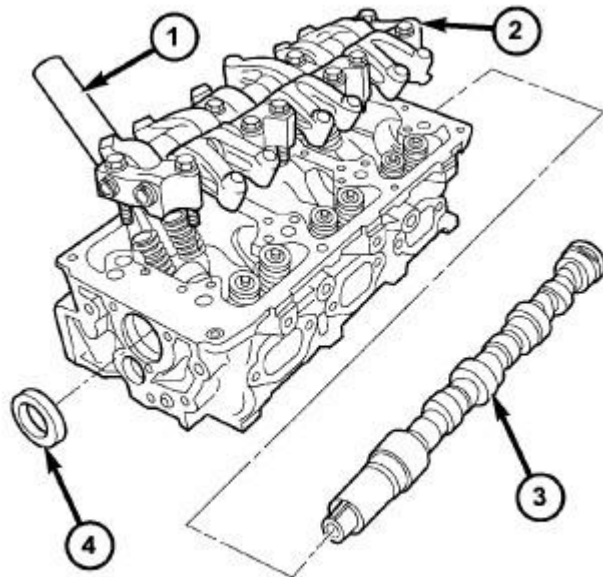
CYLINDER HEAD, CAMSHAFT & ROCKER ARM
